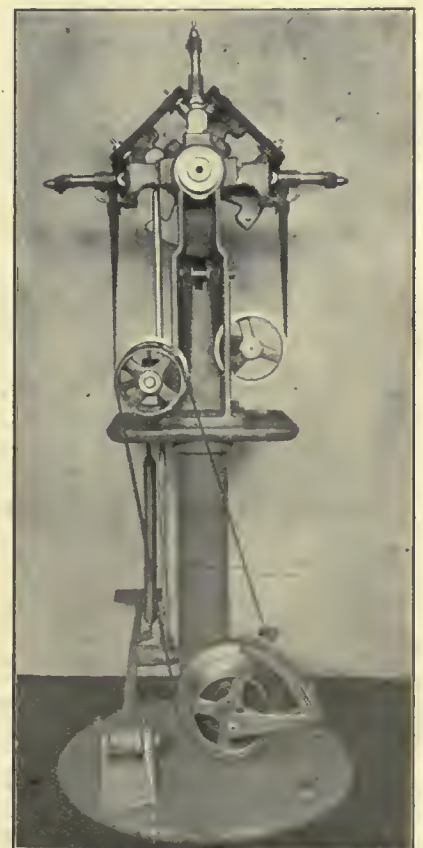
4-PLANE SHELL DRILLING MACHINE.
